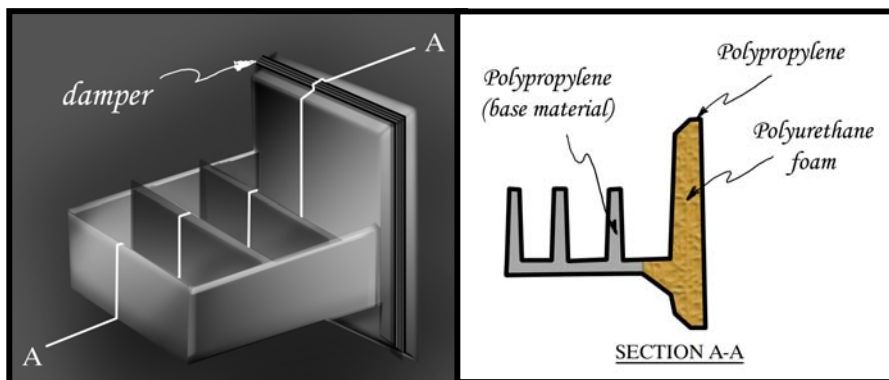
SLIDING DOOR (SECTIONAL VIEW)
